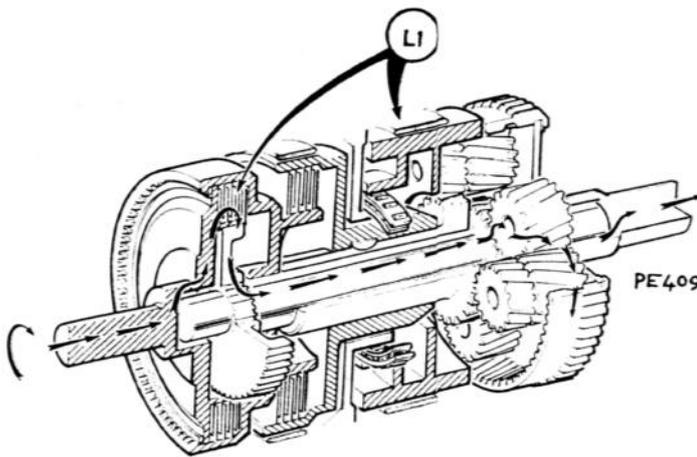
Emergency low: With this combination bottom gear remains engaged both when driving, and on the over-run, irrespective of throttle position.
